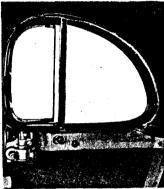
Illustration No. 96 Sedan Rear Quarter Window Glass Removal.
